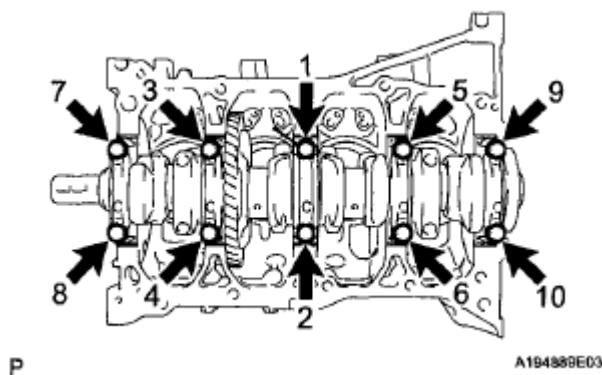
Identifying Bearing Cap Bolts Tightening Sequence
